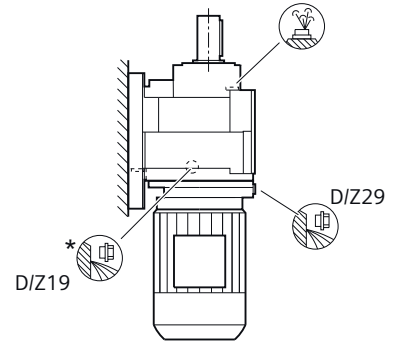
Mounting positions for helical gearbox EF/EZ, flange-mounted design, sizes 39 - 149
